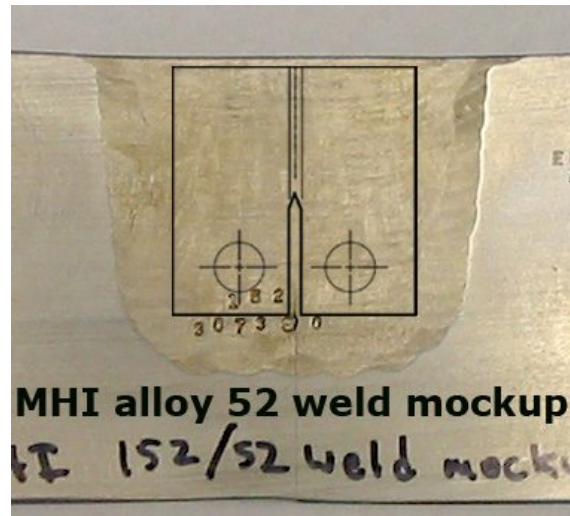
Image of the MHI alloy 52 weld showing positioning of 0.5T CT specimens.
